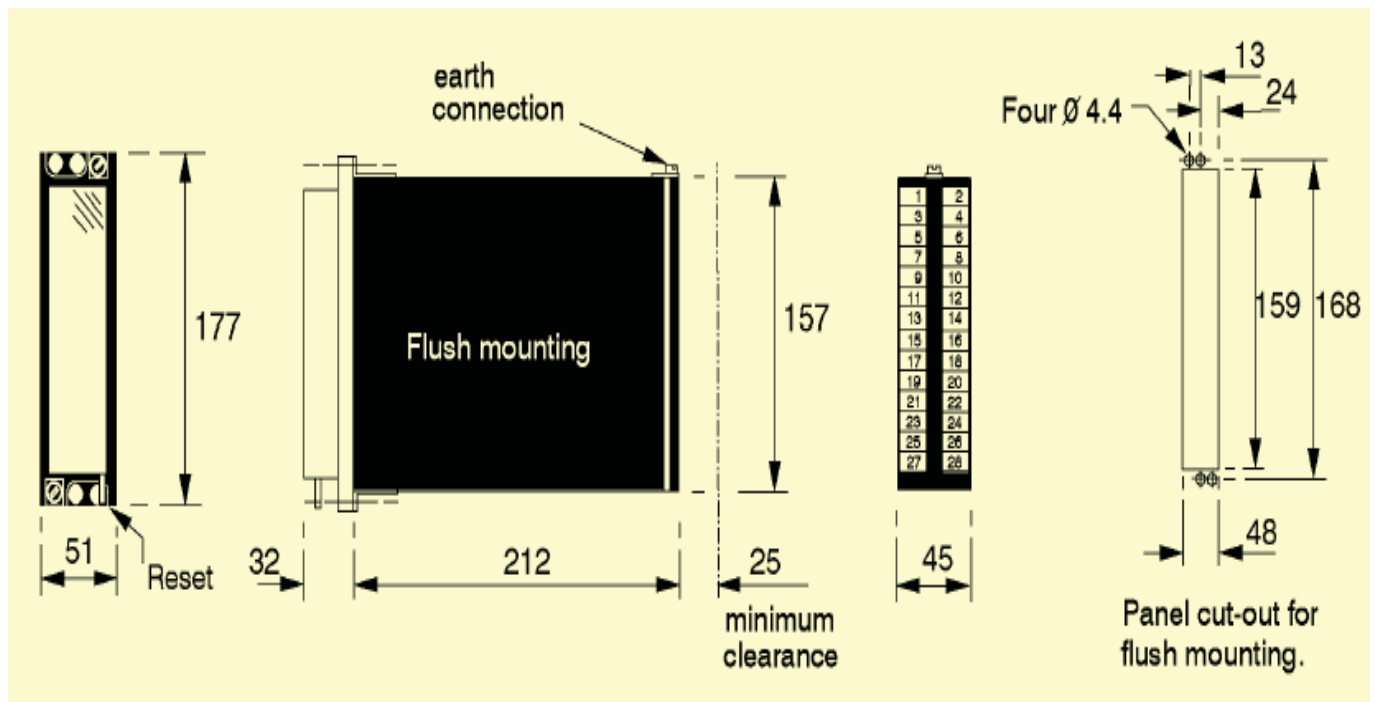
Dimensions of modular size 2 case (all dimensions are in mm)
